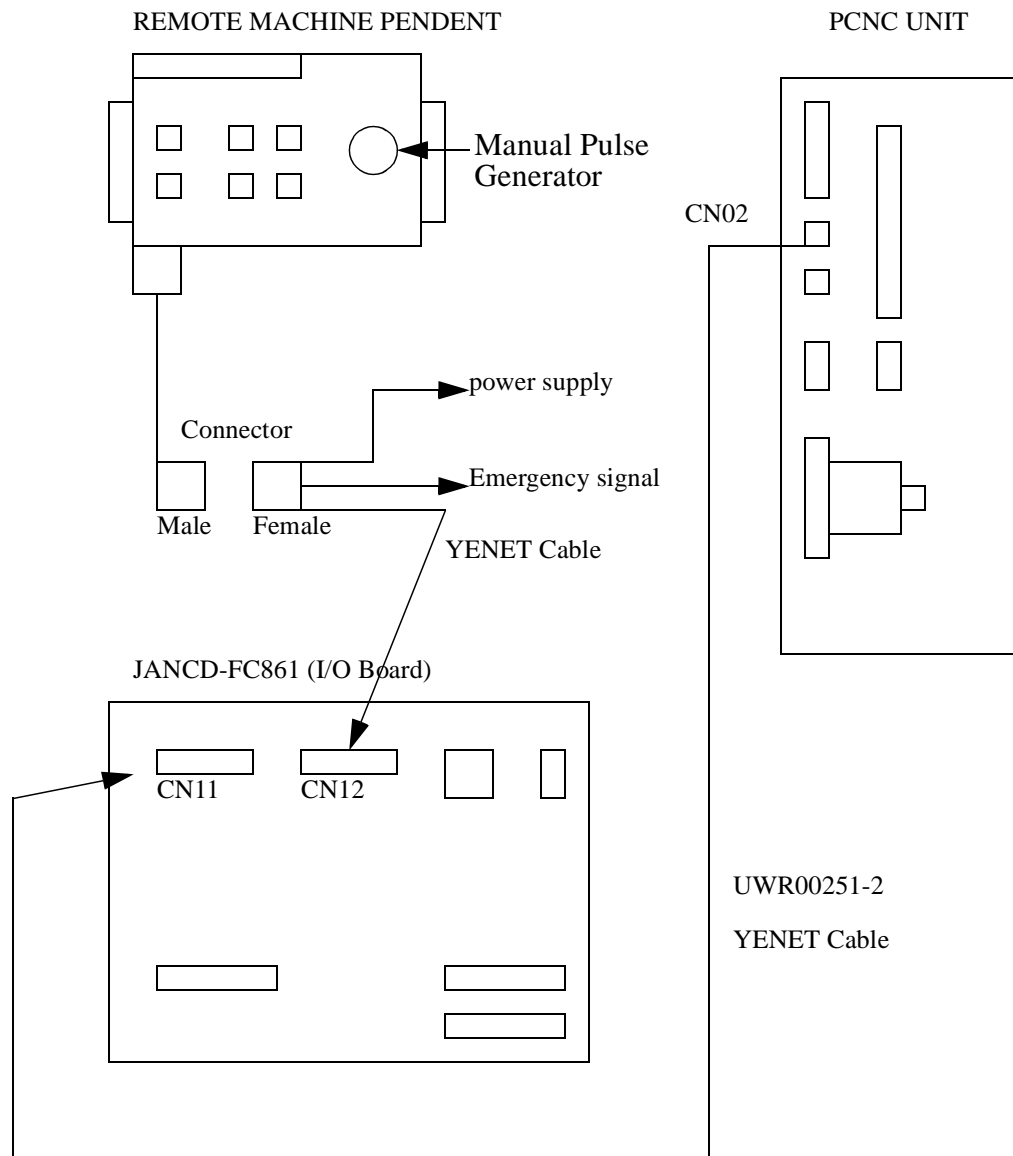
External FC861, Remote Machine Pendant, and PCNC connections
